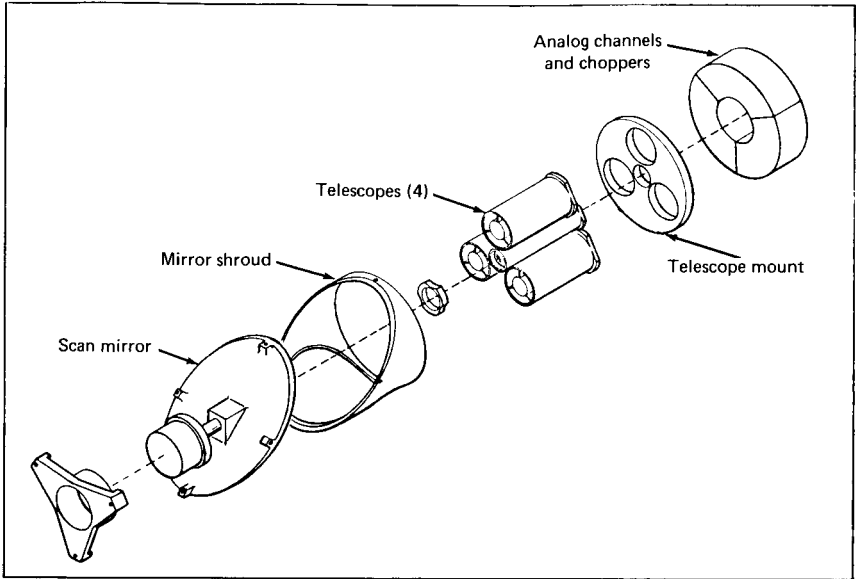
Orbiter IRTM layout. (a) Exploded view.
